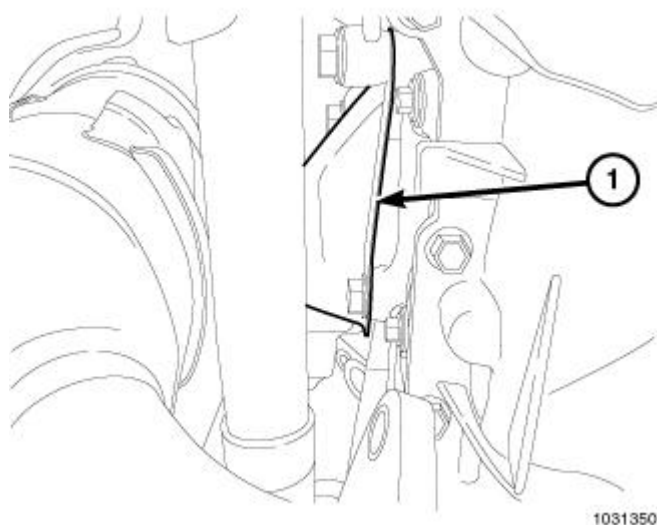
Locating Heat Shield Covering Oil Pressure Switch
